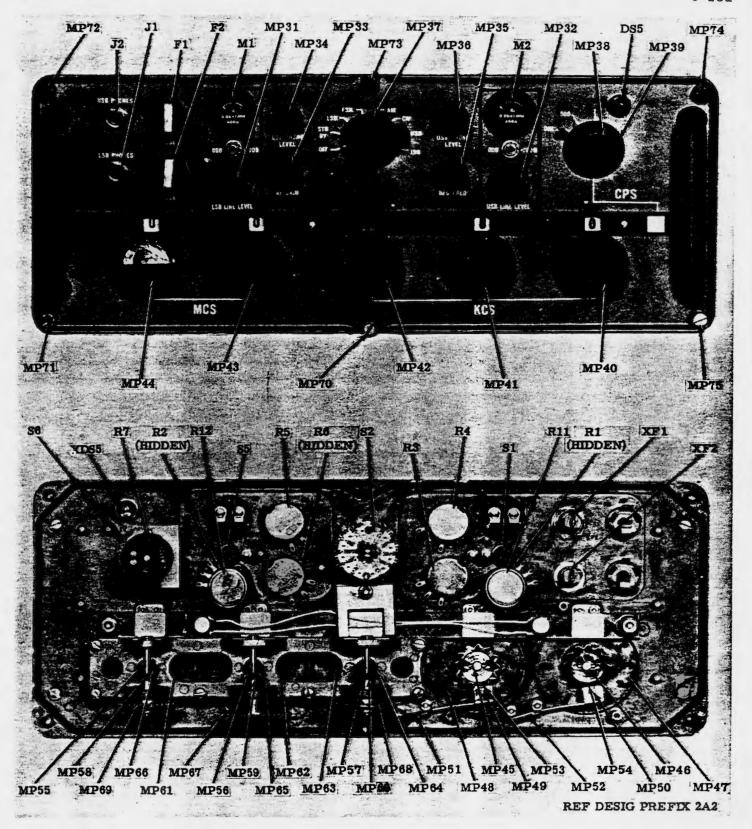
Radio Transmitter T-827 URT, Front Panel Assembly, Component Location
